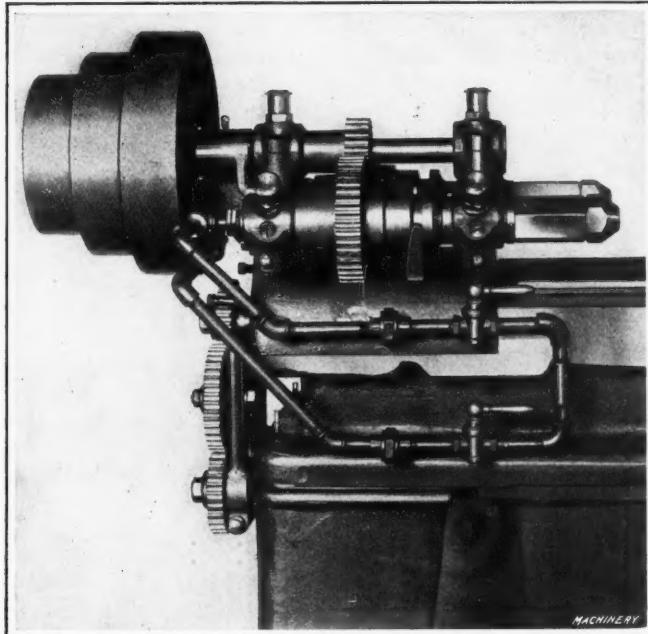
Close View of Head End of Machine with Guards removed to show Transmission
